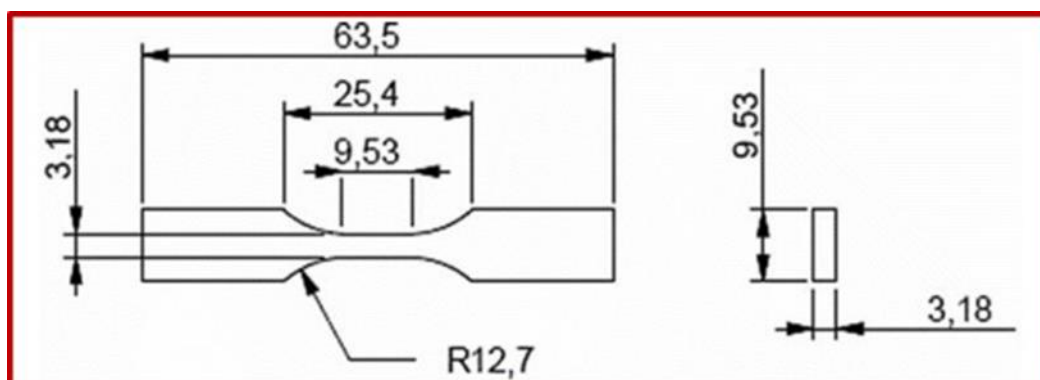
Drawing of prepared sample with proper dimensions as per ASTM 638 D by micro injection molding and 3 D printing.
